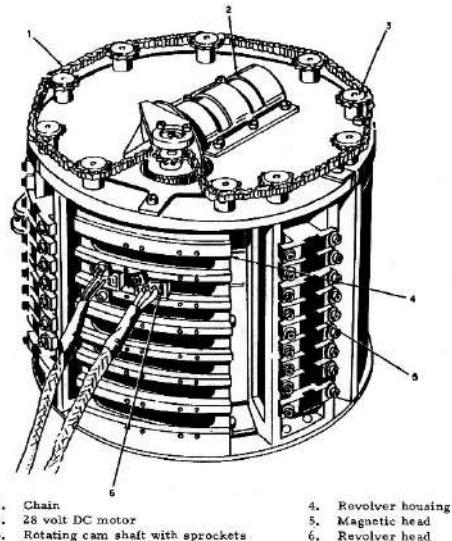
Magnetic Drum with Head Lifting Mechanism
